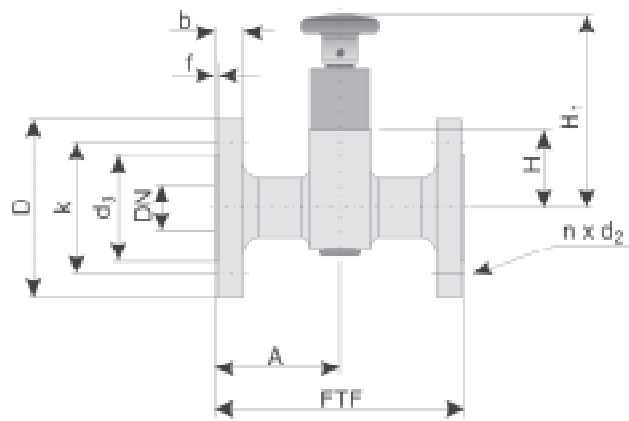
Dimensional drawing of the sampling valve (DN 25)
